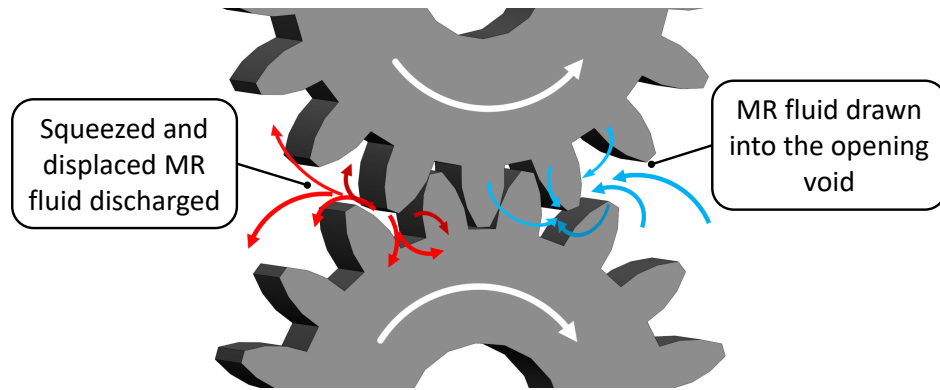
Process of squeezing MR fluid between the teeth of rotating spur gears in mesh.
